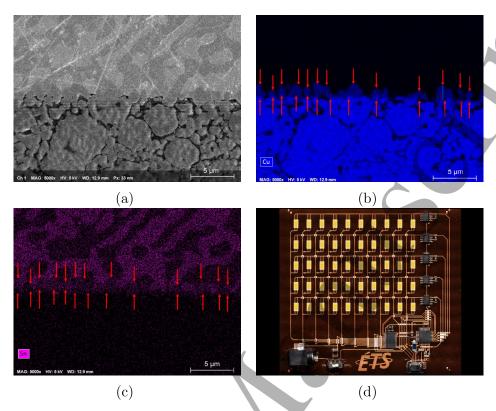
Cross-sectional analysis of a soldered assembly joint formed on a copper print treated with sodium bicarbonate. (a) SEM of the cross-sectional assembly solder joint. (b) EDS micrograph of the copper present in the assembly. (c) EDS micrograph of the tin present in the assembly. (d) Printed LED circuit treated with sodium bicarbonate and fully assembled.
